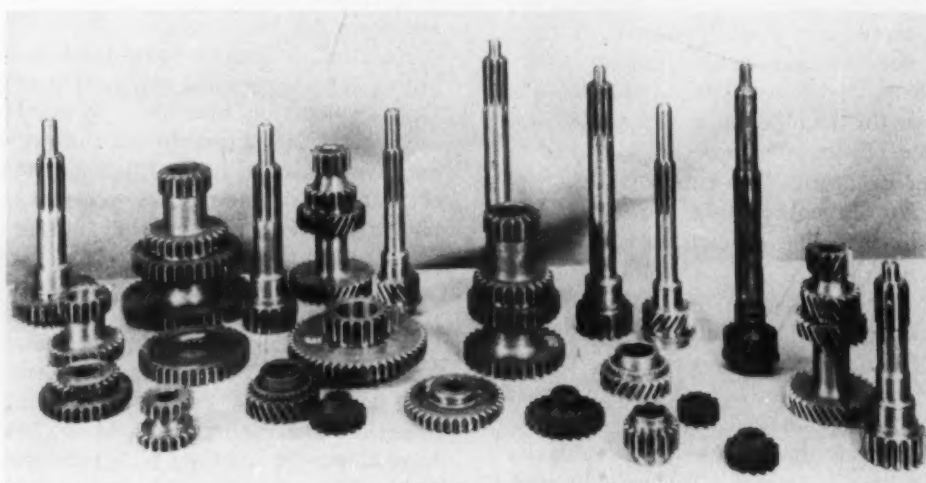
Of these 39 gears produced by Canadian Acme, 32 can be finish shaved on a single Michigan 870 gear shaver, using only 12 cutters.
